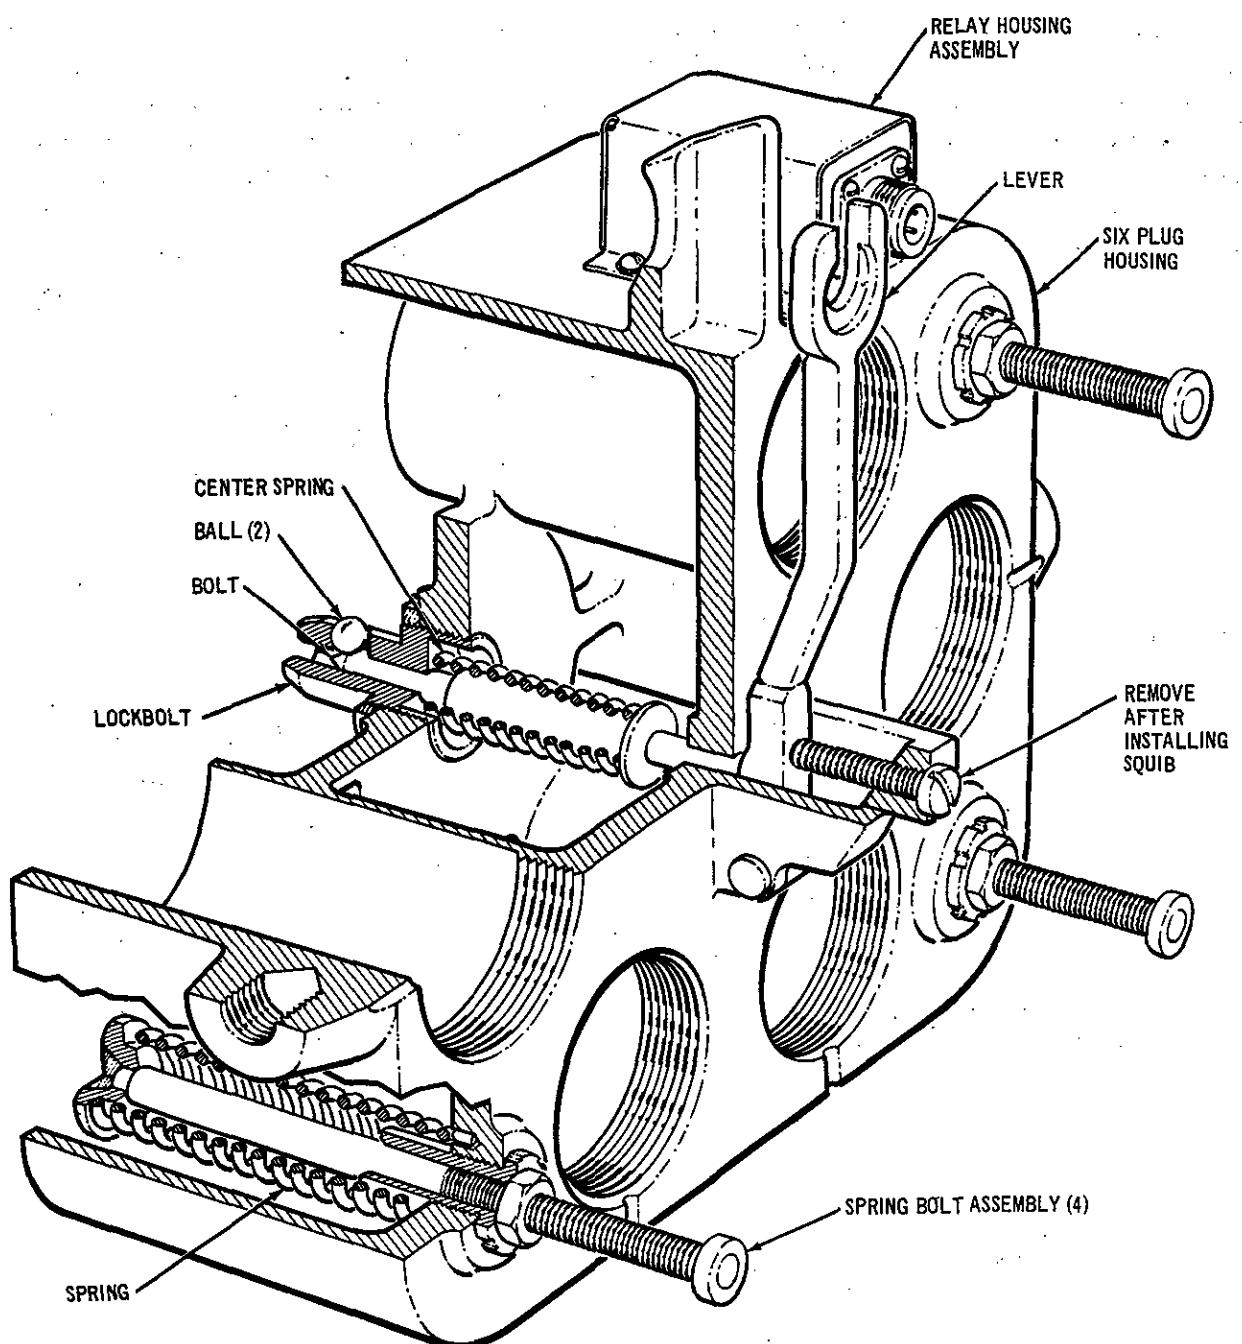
Long Cable Mast Five Plug Release Housing Prototype
